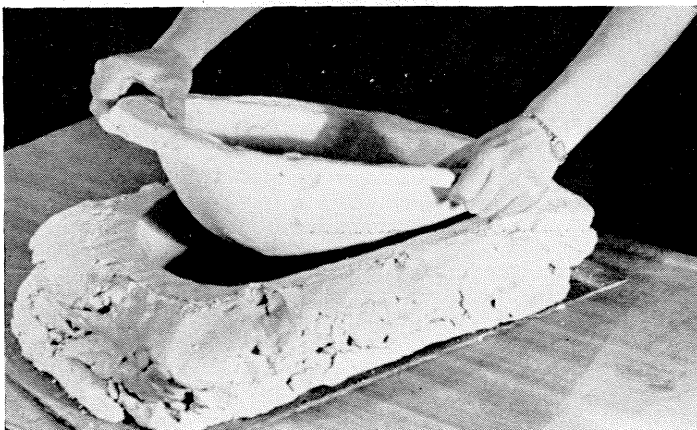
Making of plaster mold in workshop of Industrial Design Section. (Second year work) Photograph by B. Morant
